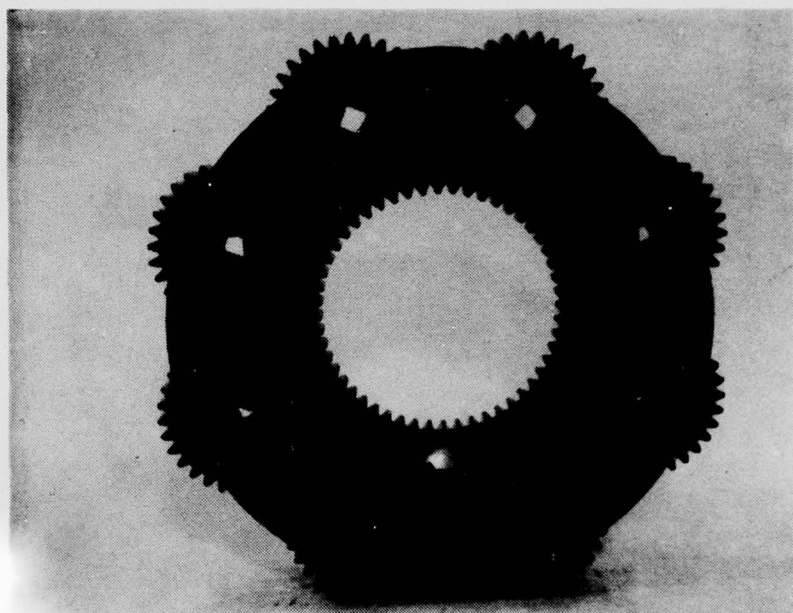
Upper planetary assembly after 19-minute loss-of-lube test of transmission number 2.
